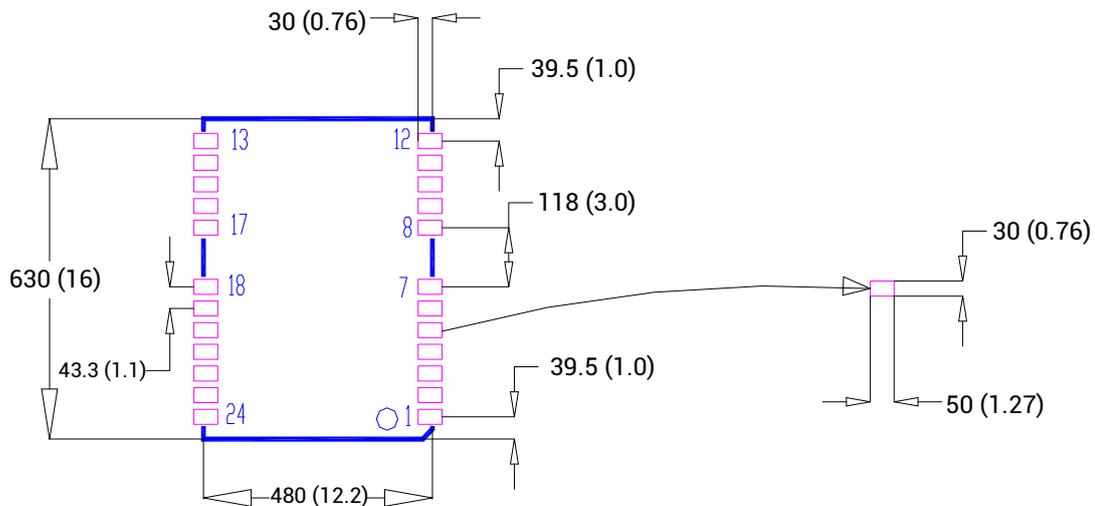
UM620 Series Modules Recommended PCB Packaging (unit: mil, in brackets: mm)
